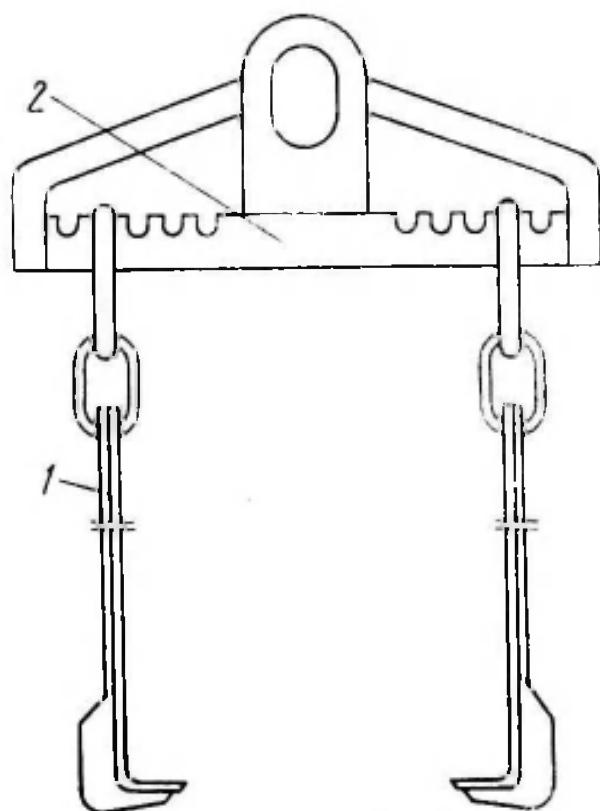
Two-bar spread frame for removing and mounting the windings
